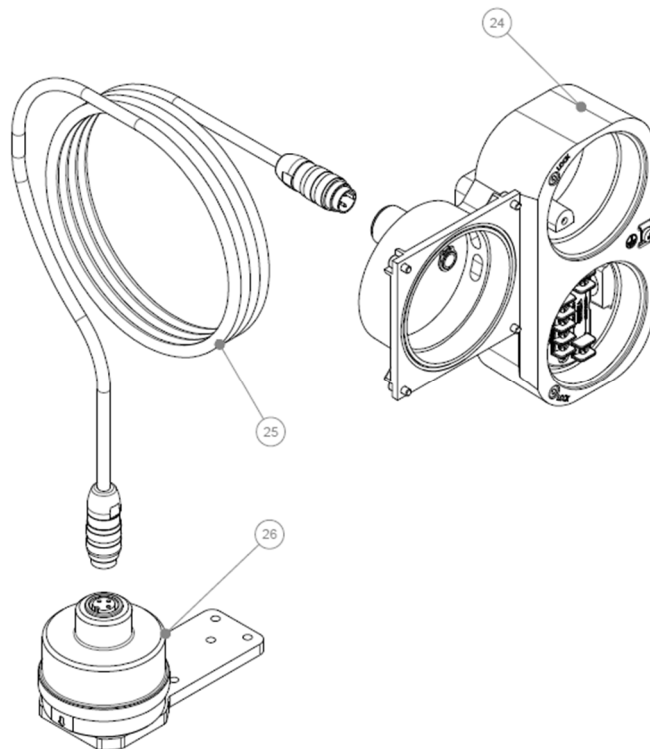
Exploded view of VVP10 HART remote sensor.
